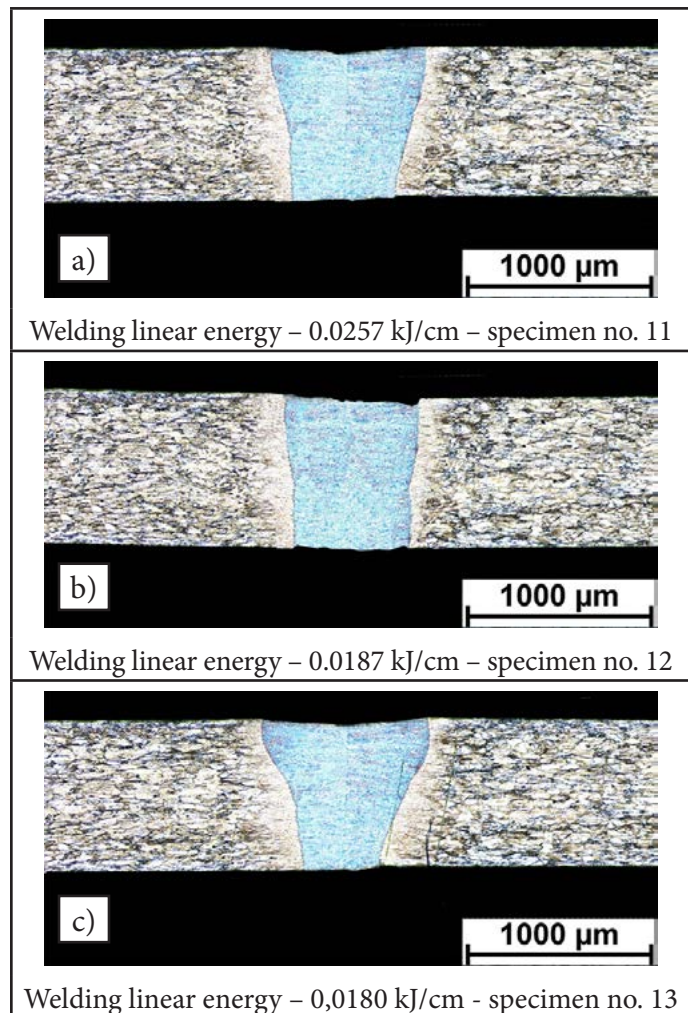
Macrostructure of the single-spot laser beam welded joints made of steel 0H15N7M2J using a linear energy of 0.0257 kJ/cm – specimen no. 11 (a), 0.0187 kJ/cm – specimen no. 12 (b) and 0.0180 kJ/cm – specimen no. 13 (c)
